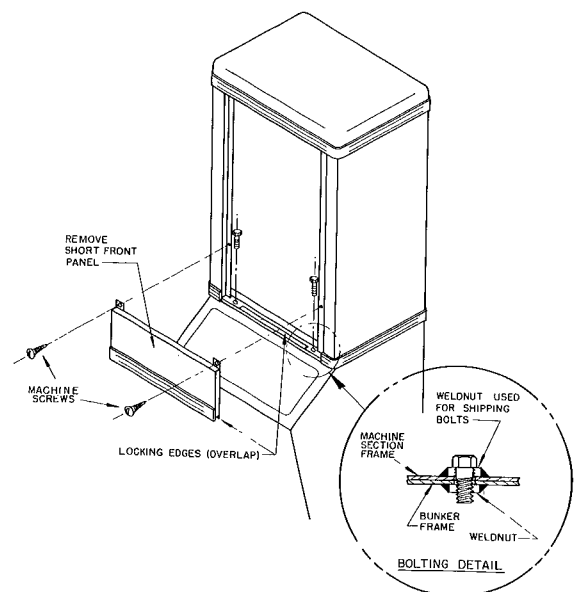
BOLTING MACHINE SECTION TO BIN
